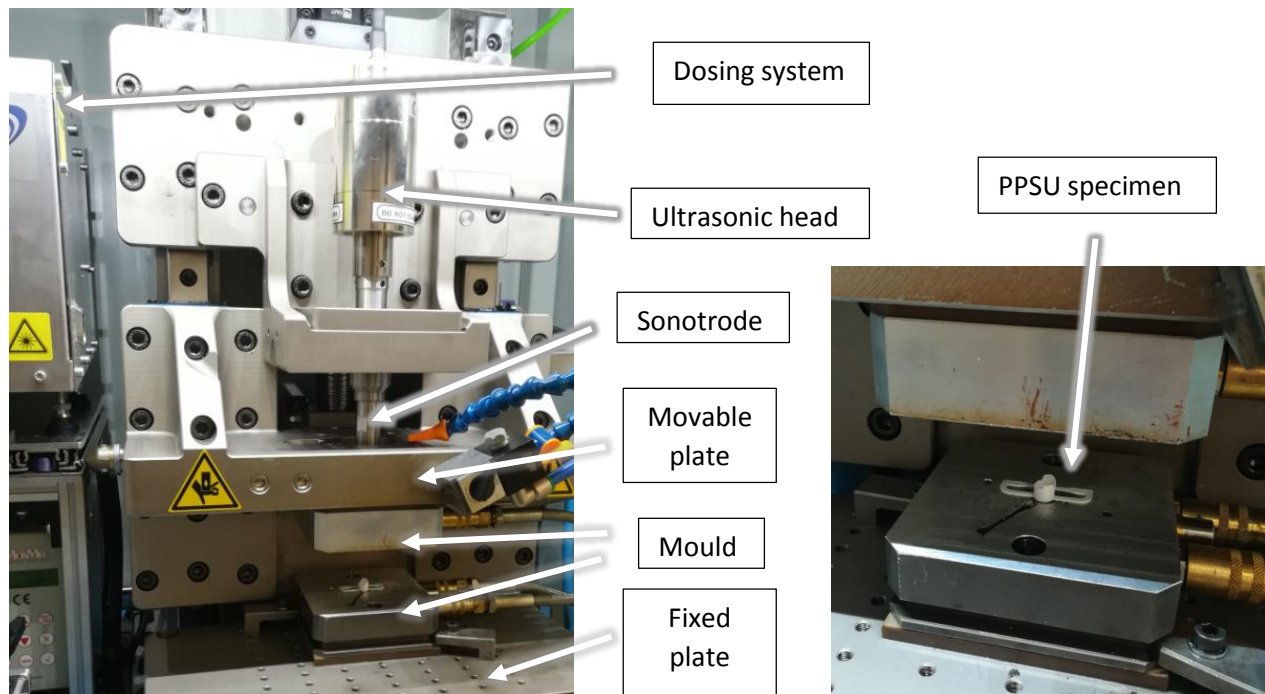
Experimental setup: a) Sonorus® 1G moulding machine, b) mould
